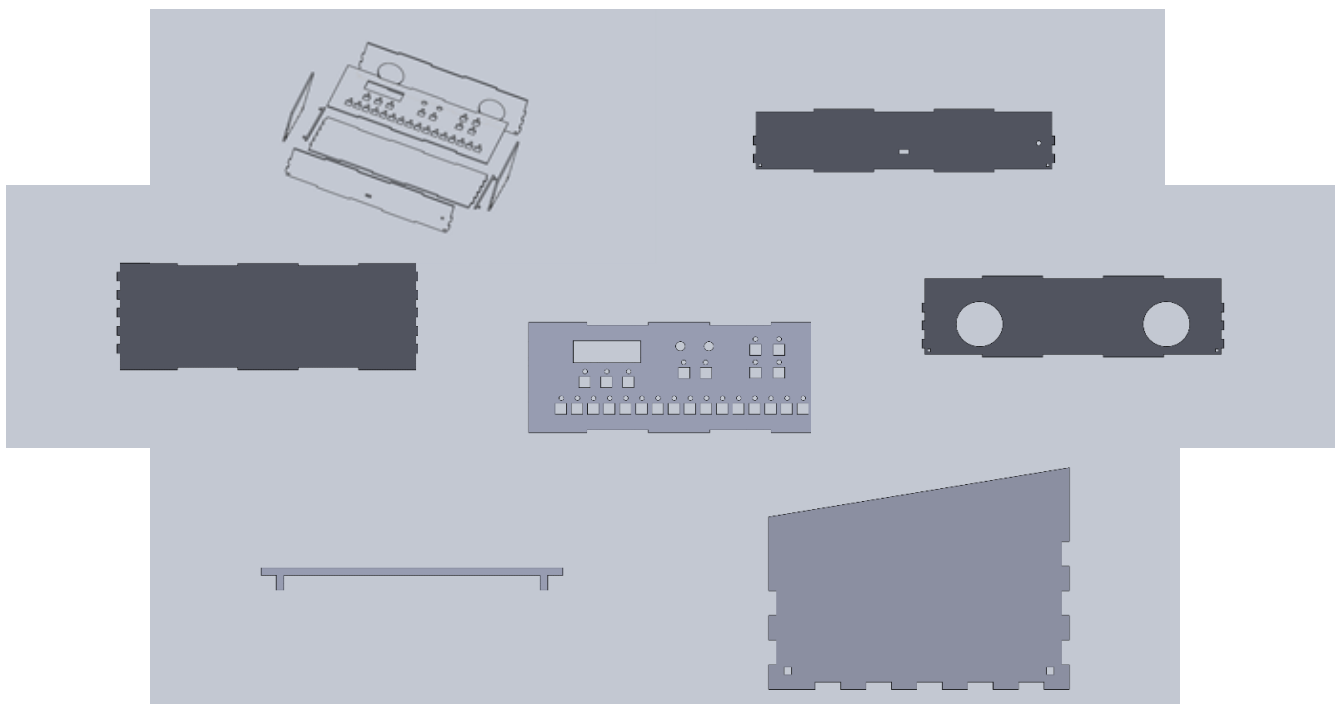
MULTIPLE DESIGN VIEWS OF THE DRUM MACHINE HOUSING COMPONENTS
